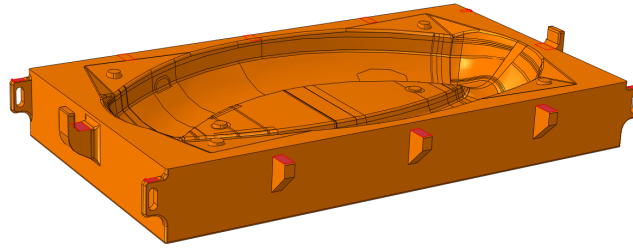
3D CAD view of the industrial mold: highlighting of the frame’s support zones
